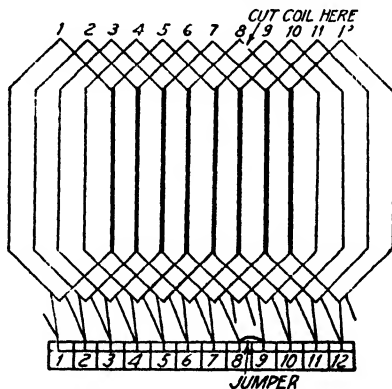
Method of Cutting Out a Defective Coil in a Single-Parallel (Lap) Winding
